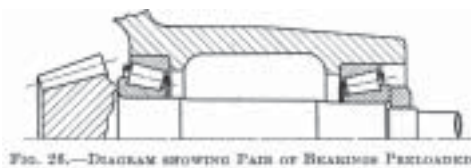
DIAGRAM SHOWING PAIR OF BEARINGS PRELOADED
